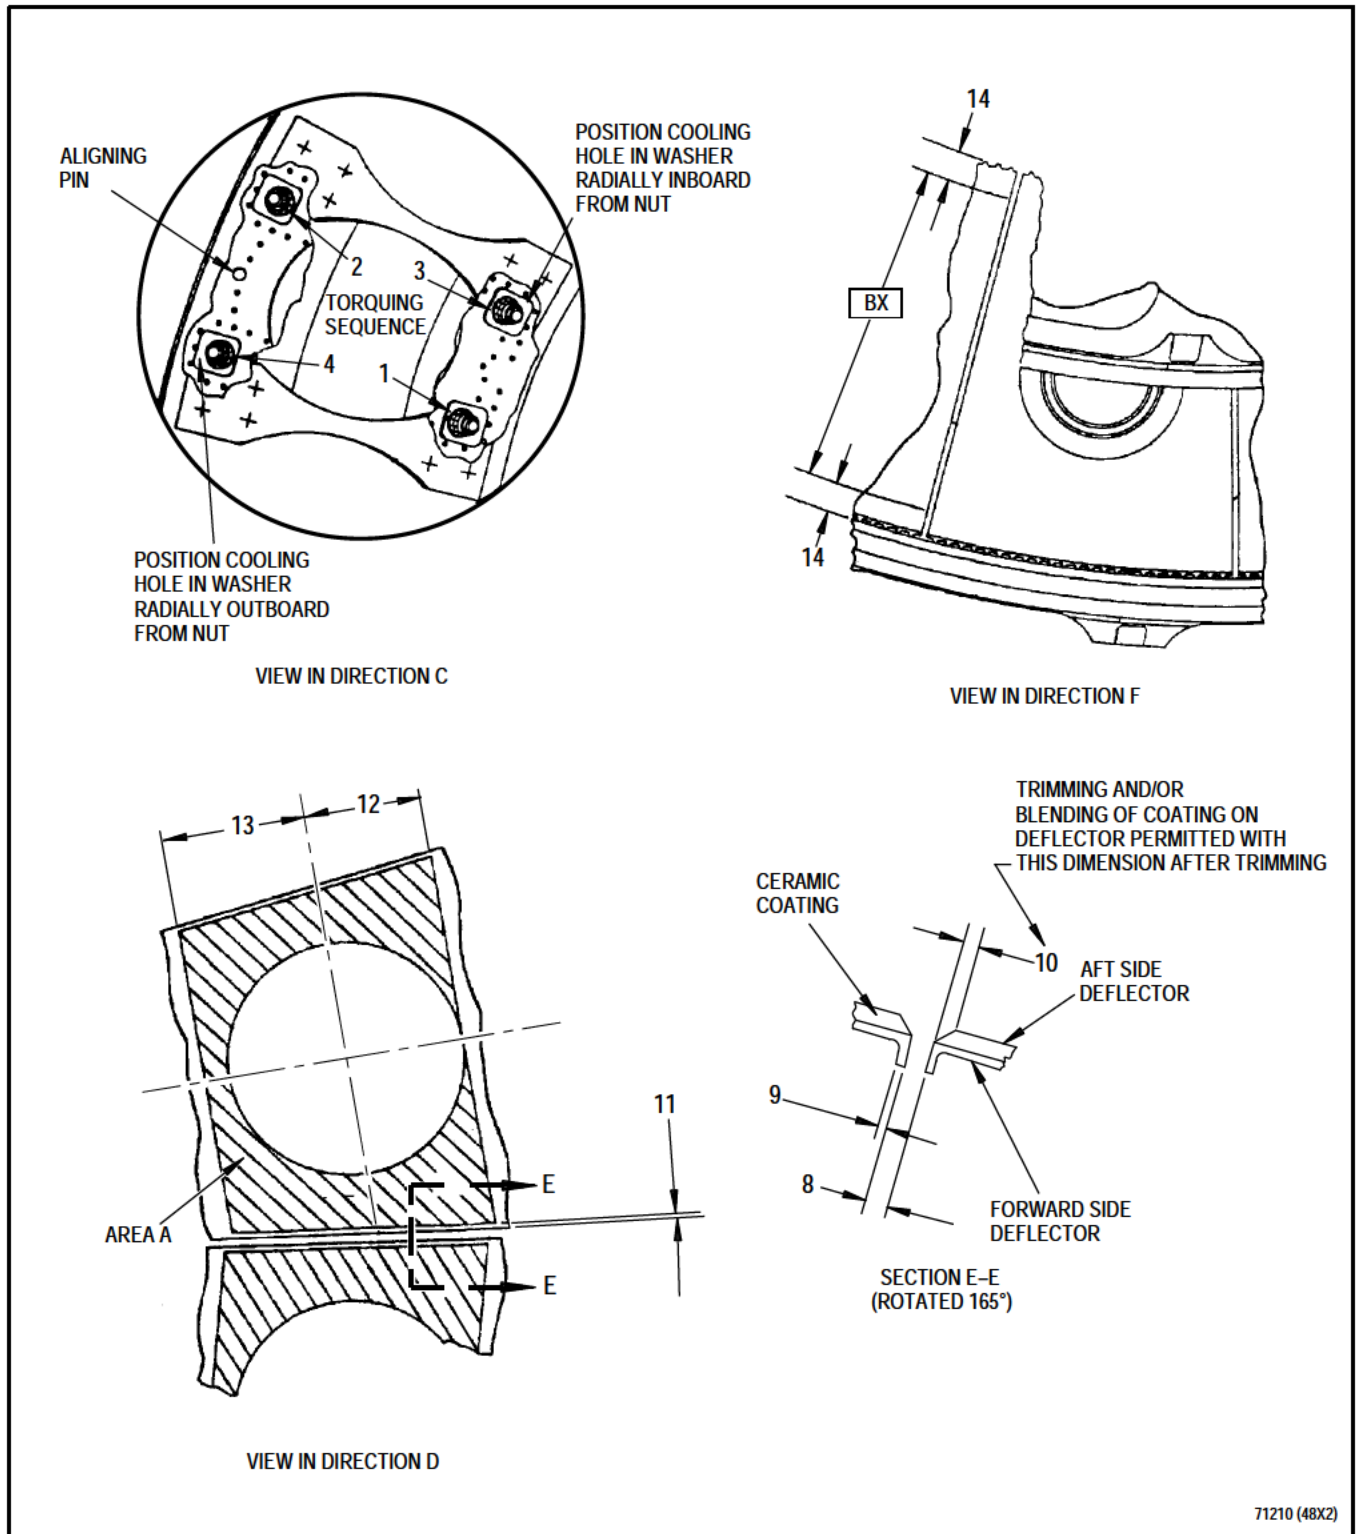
Combustion Chamber Assembly - Deflector Removal And Replacement With Combustion Chamber Assembled (Sheet 2 of 2)
